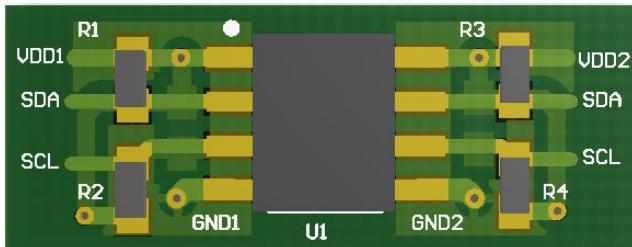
NSI8200-DSPR Recommended PCB Layout
